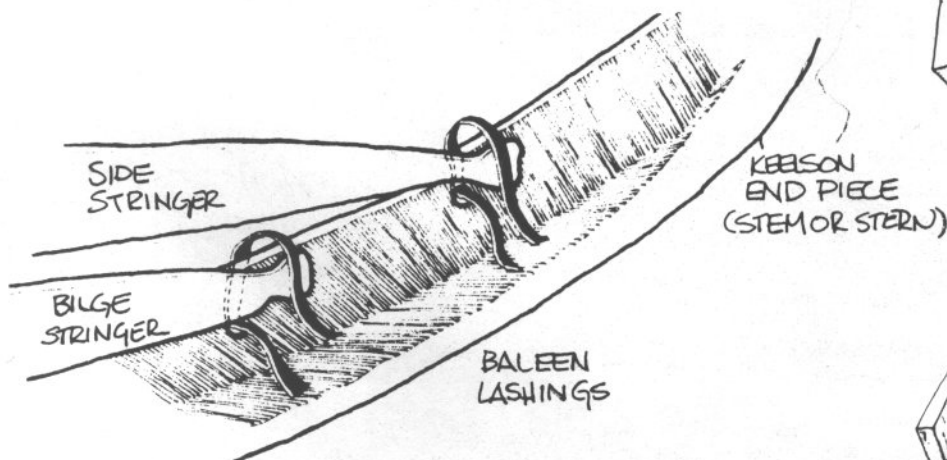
FITTING AND LASHING BILGE AND SIDE STRINGERS TO KEELSON END PIECE.
